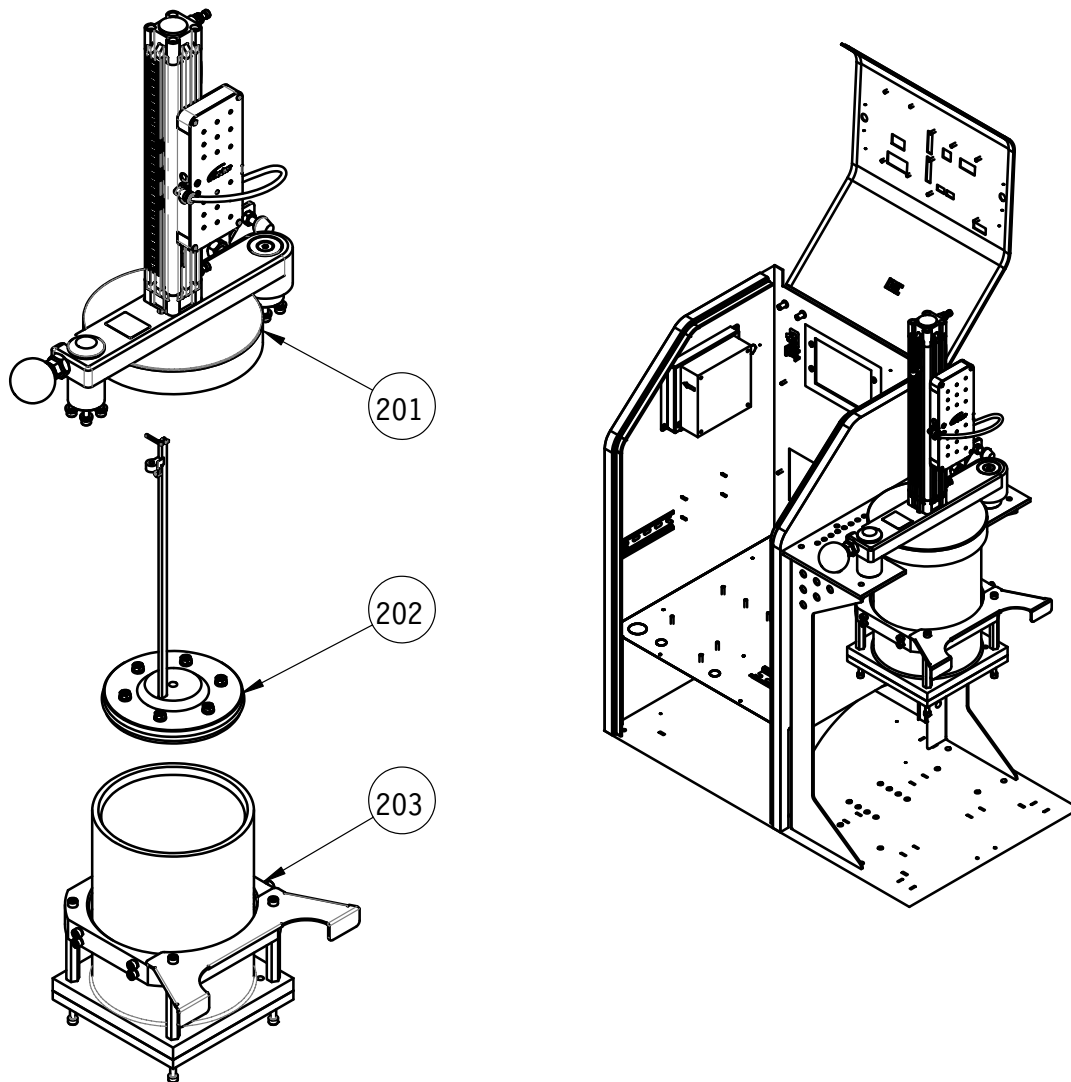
Pivot lid/plunger (134)/hopper (134) assembly
